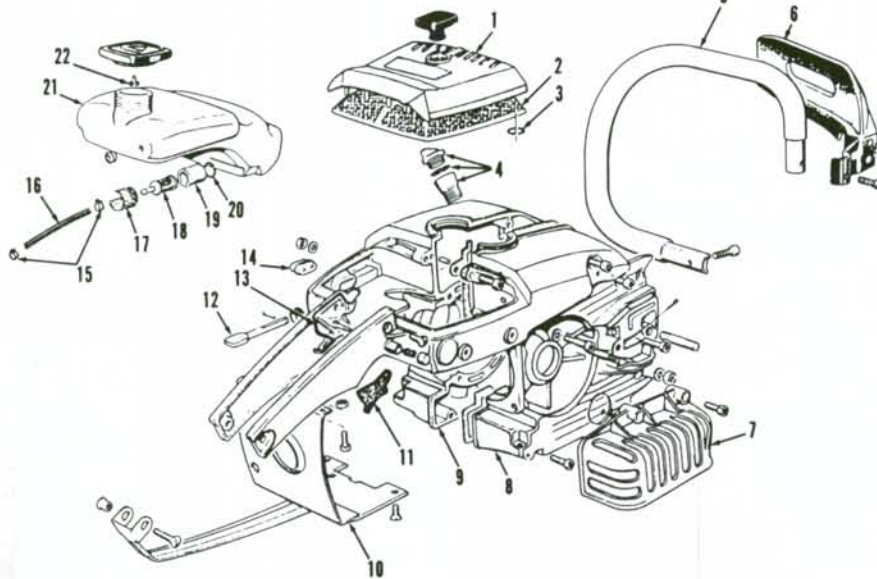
Exploded view of crankcase, front handle assembly, fuel tank and related components used on Models 070, 070S and A70.
